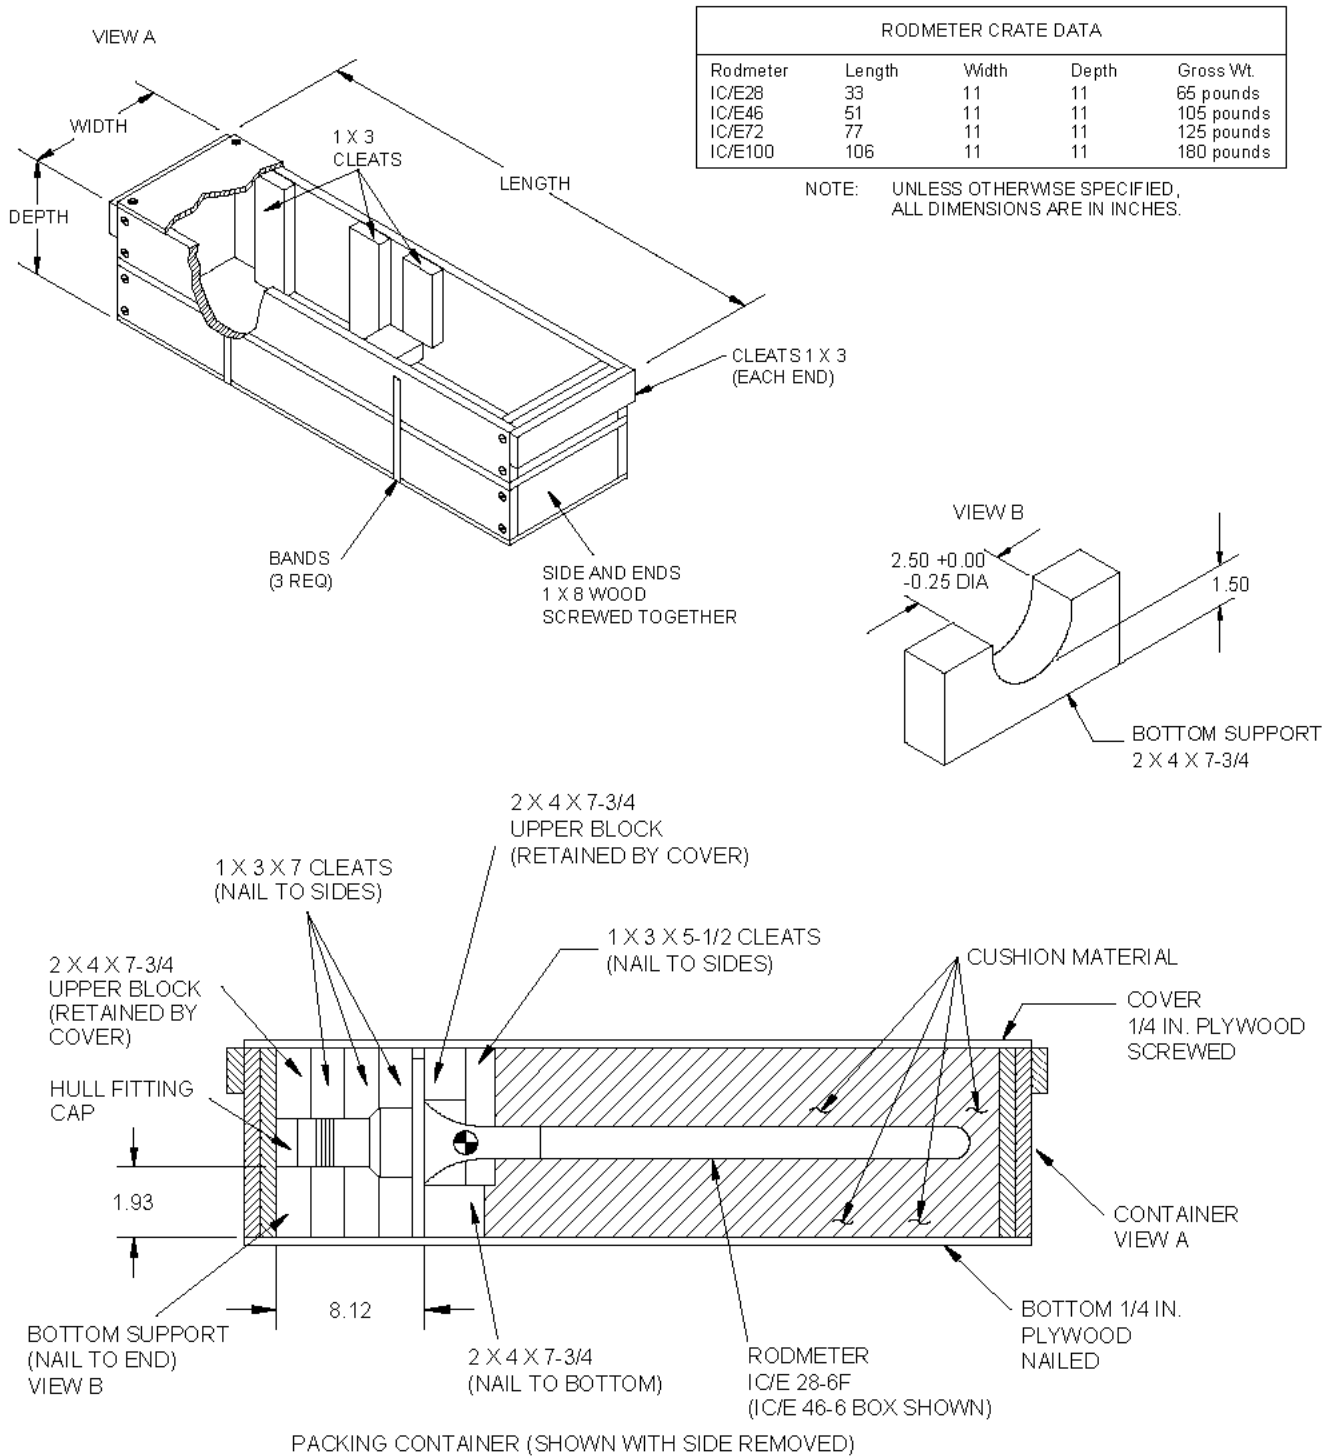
Unit 1 or 6 Rodmeter Packing
